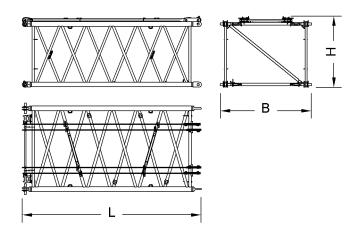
2821 boom section dimensions 20 ft for LR1300SX/LR1300SXW
